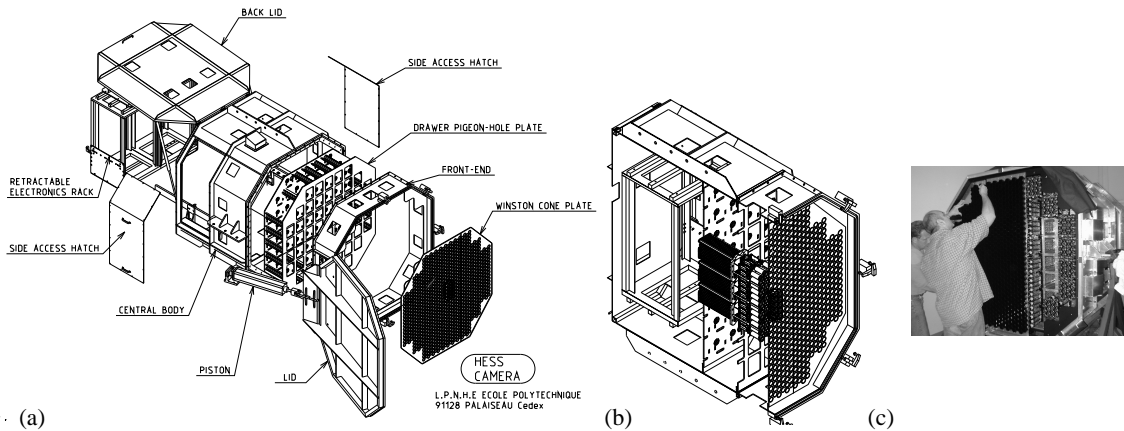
Mechanics of the HESS camera: (a) exploded view, showing all elements (b) cut-through view of closed camera with three drawers in place (c) test mounting of drawers and cone plate with unaluminized cones.
